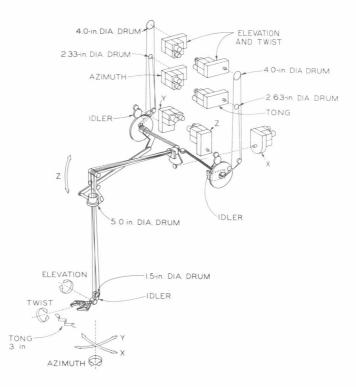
The ANL Mark E4A slave-arm schematic drawing. The drawing for the master arm is similar (ref. 53).
